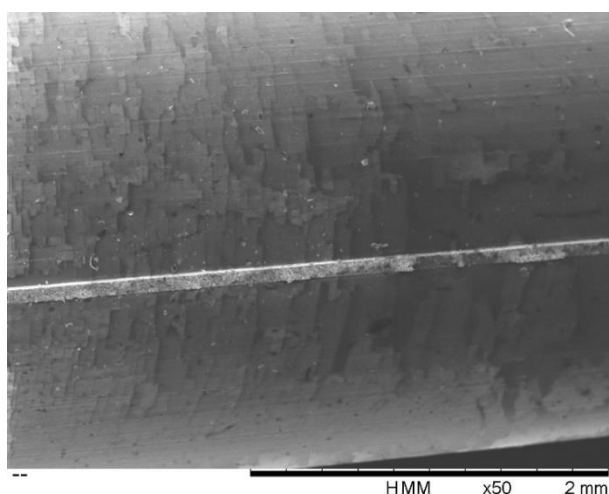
SEM image of unused silicone O-rings showing a smooth surface with compression molding marks on the surface
